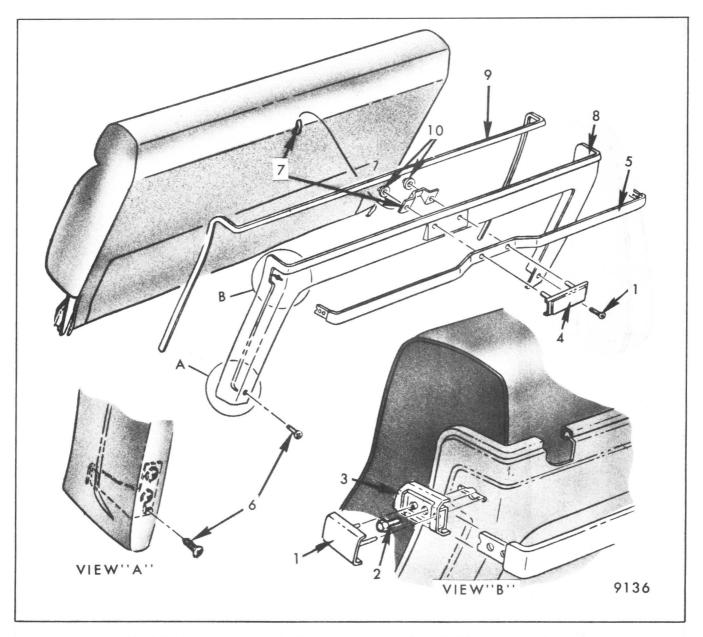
Front Seat Back Assist Strap and Panel Assembly - Cadillac Four-Door Styles
